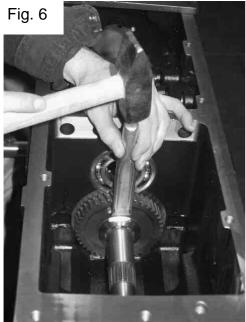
shows how to mount the ring nut and ring nut retainer plate after the gear has been mounted on the taper pinion.
